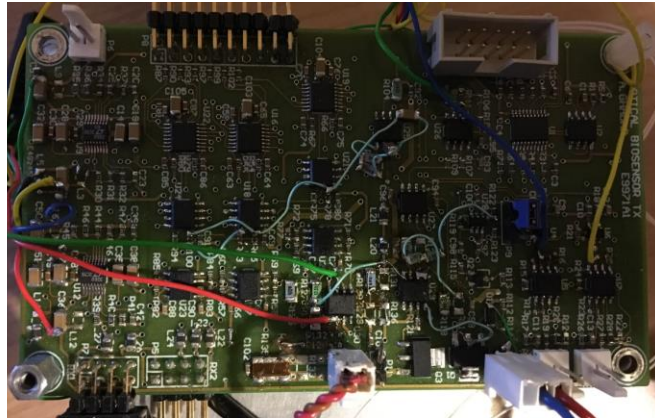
Top side of the emitter board. The board size is 110 mm x 63 mm.
